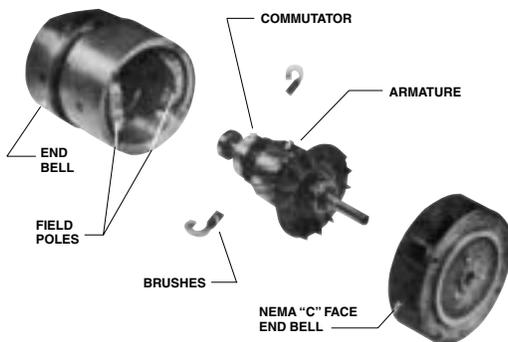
, Exploded View of "Wound-Field" DC Motor
